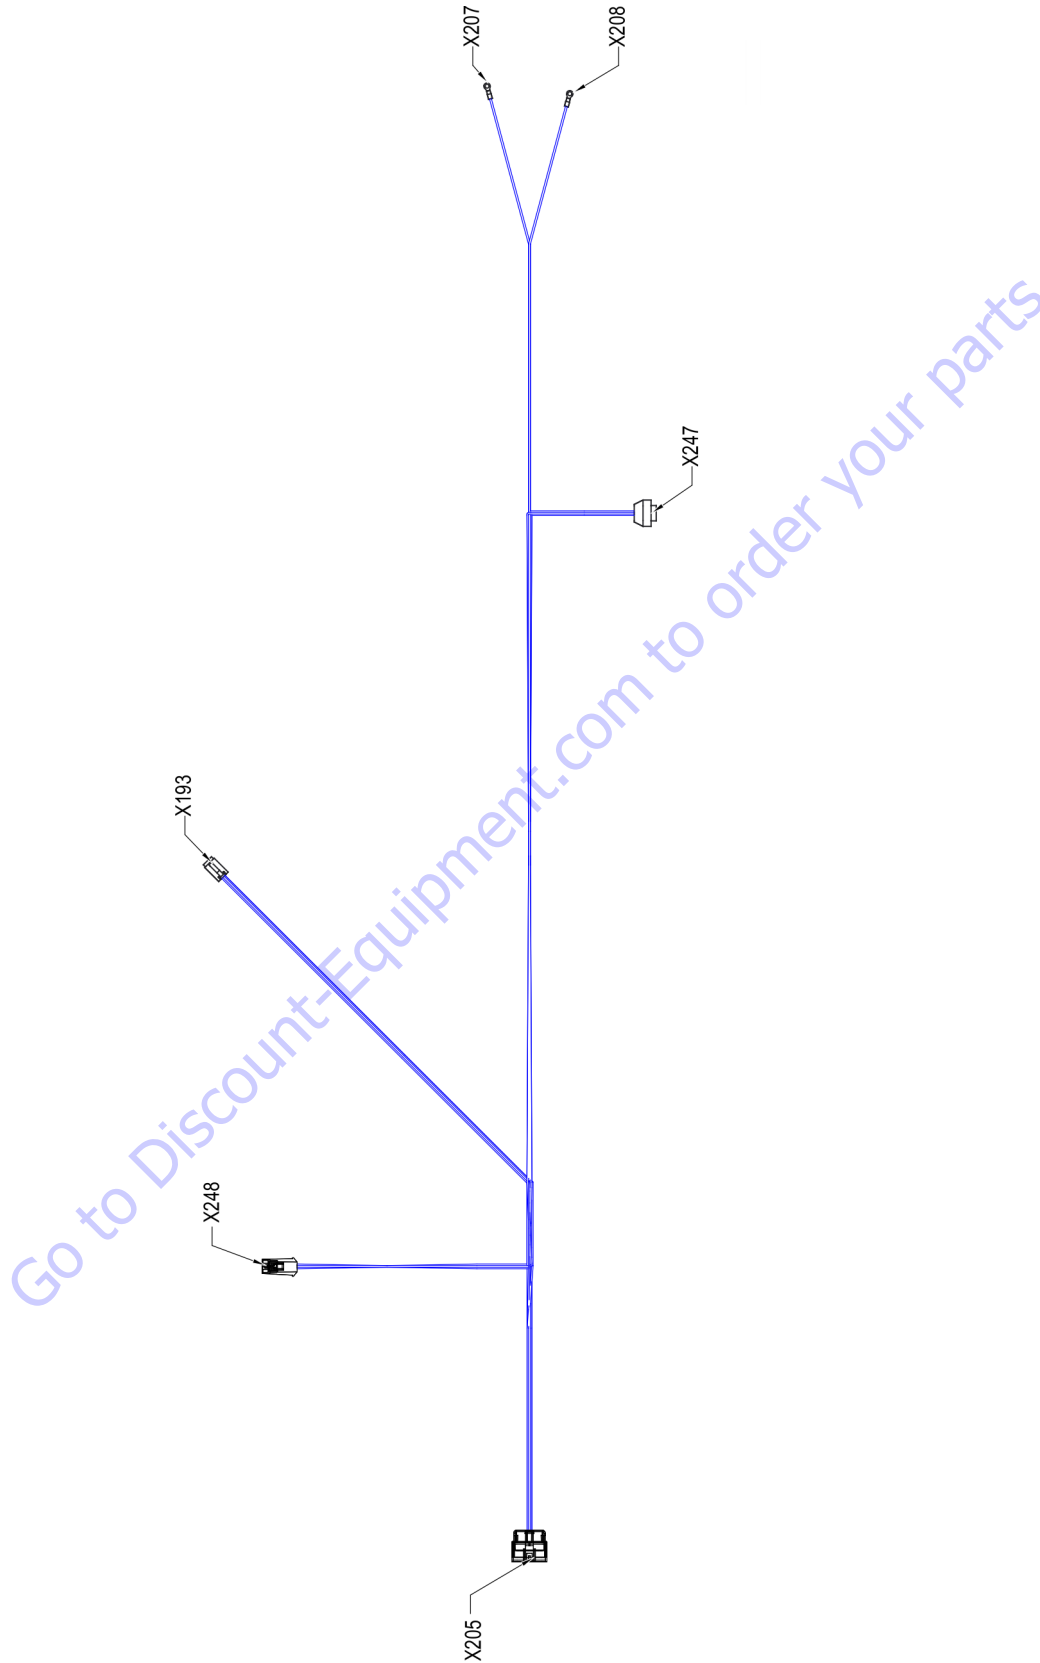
GM Engine Harness - Sheet 1 of 3
